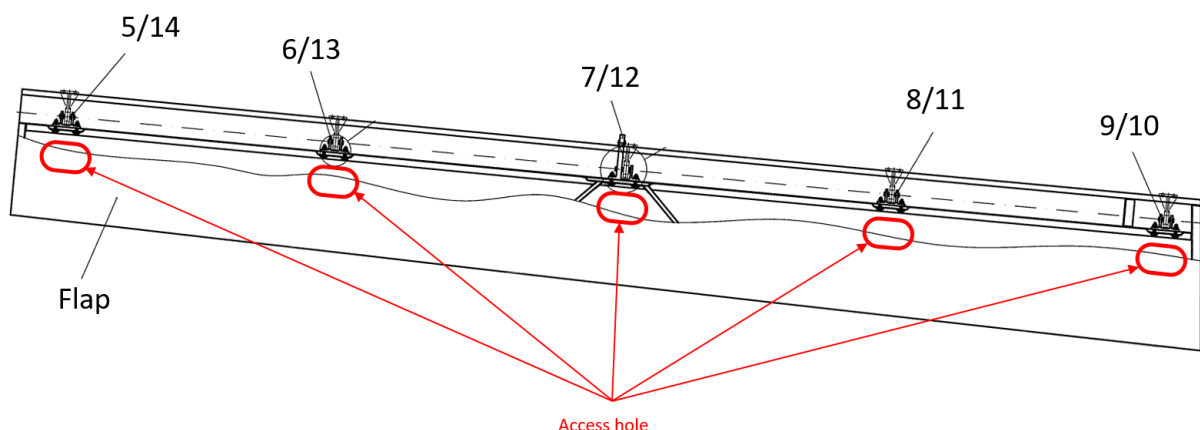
Flap Access Holes and Hinge Bracket Locations (LH shown, RH mirrored)
